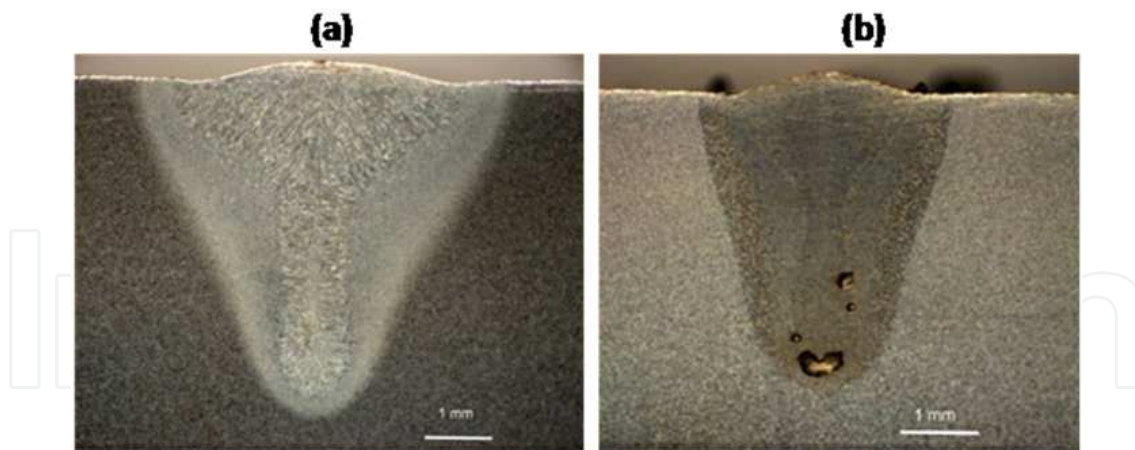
Comparison between (a) a laser weld and (b) a hybrid laser-arc weld in 250 grade mild steel.
